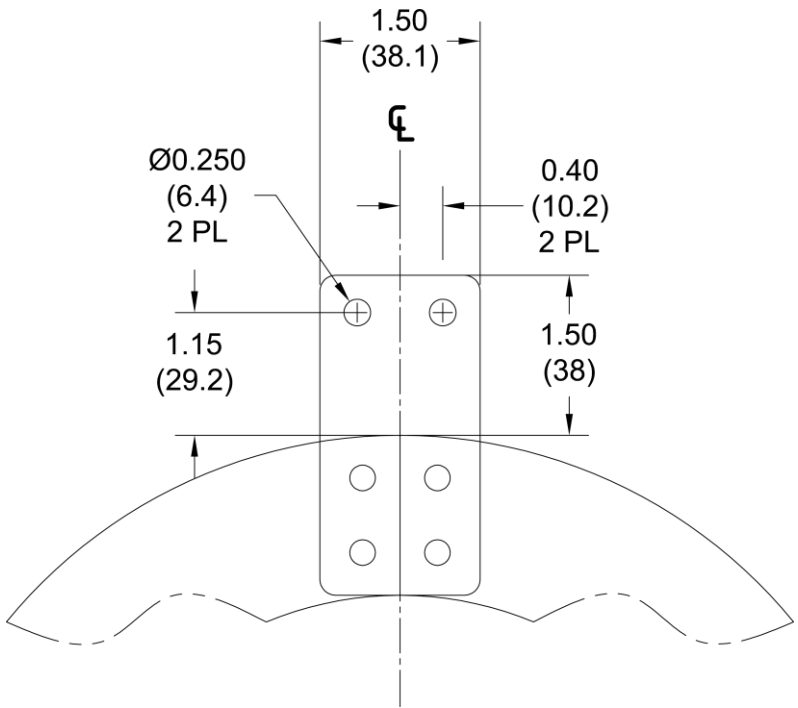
24" to 40" Shaft Diameter Dimensions
